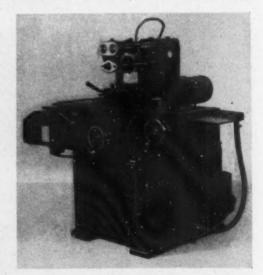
Birfield-Somua type Z1B milling machine set-up for horizontal milling
